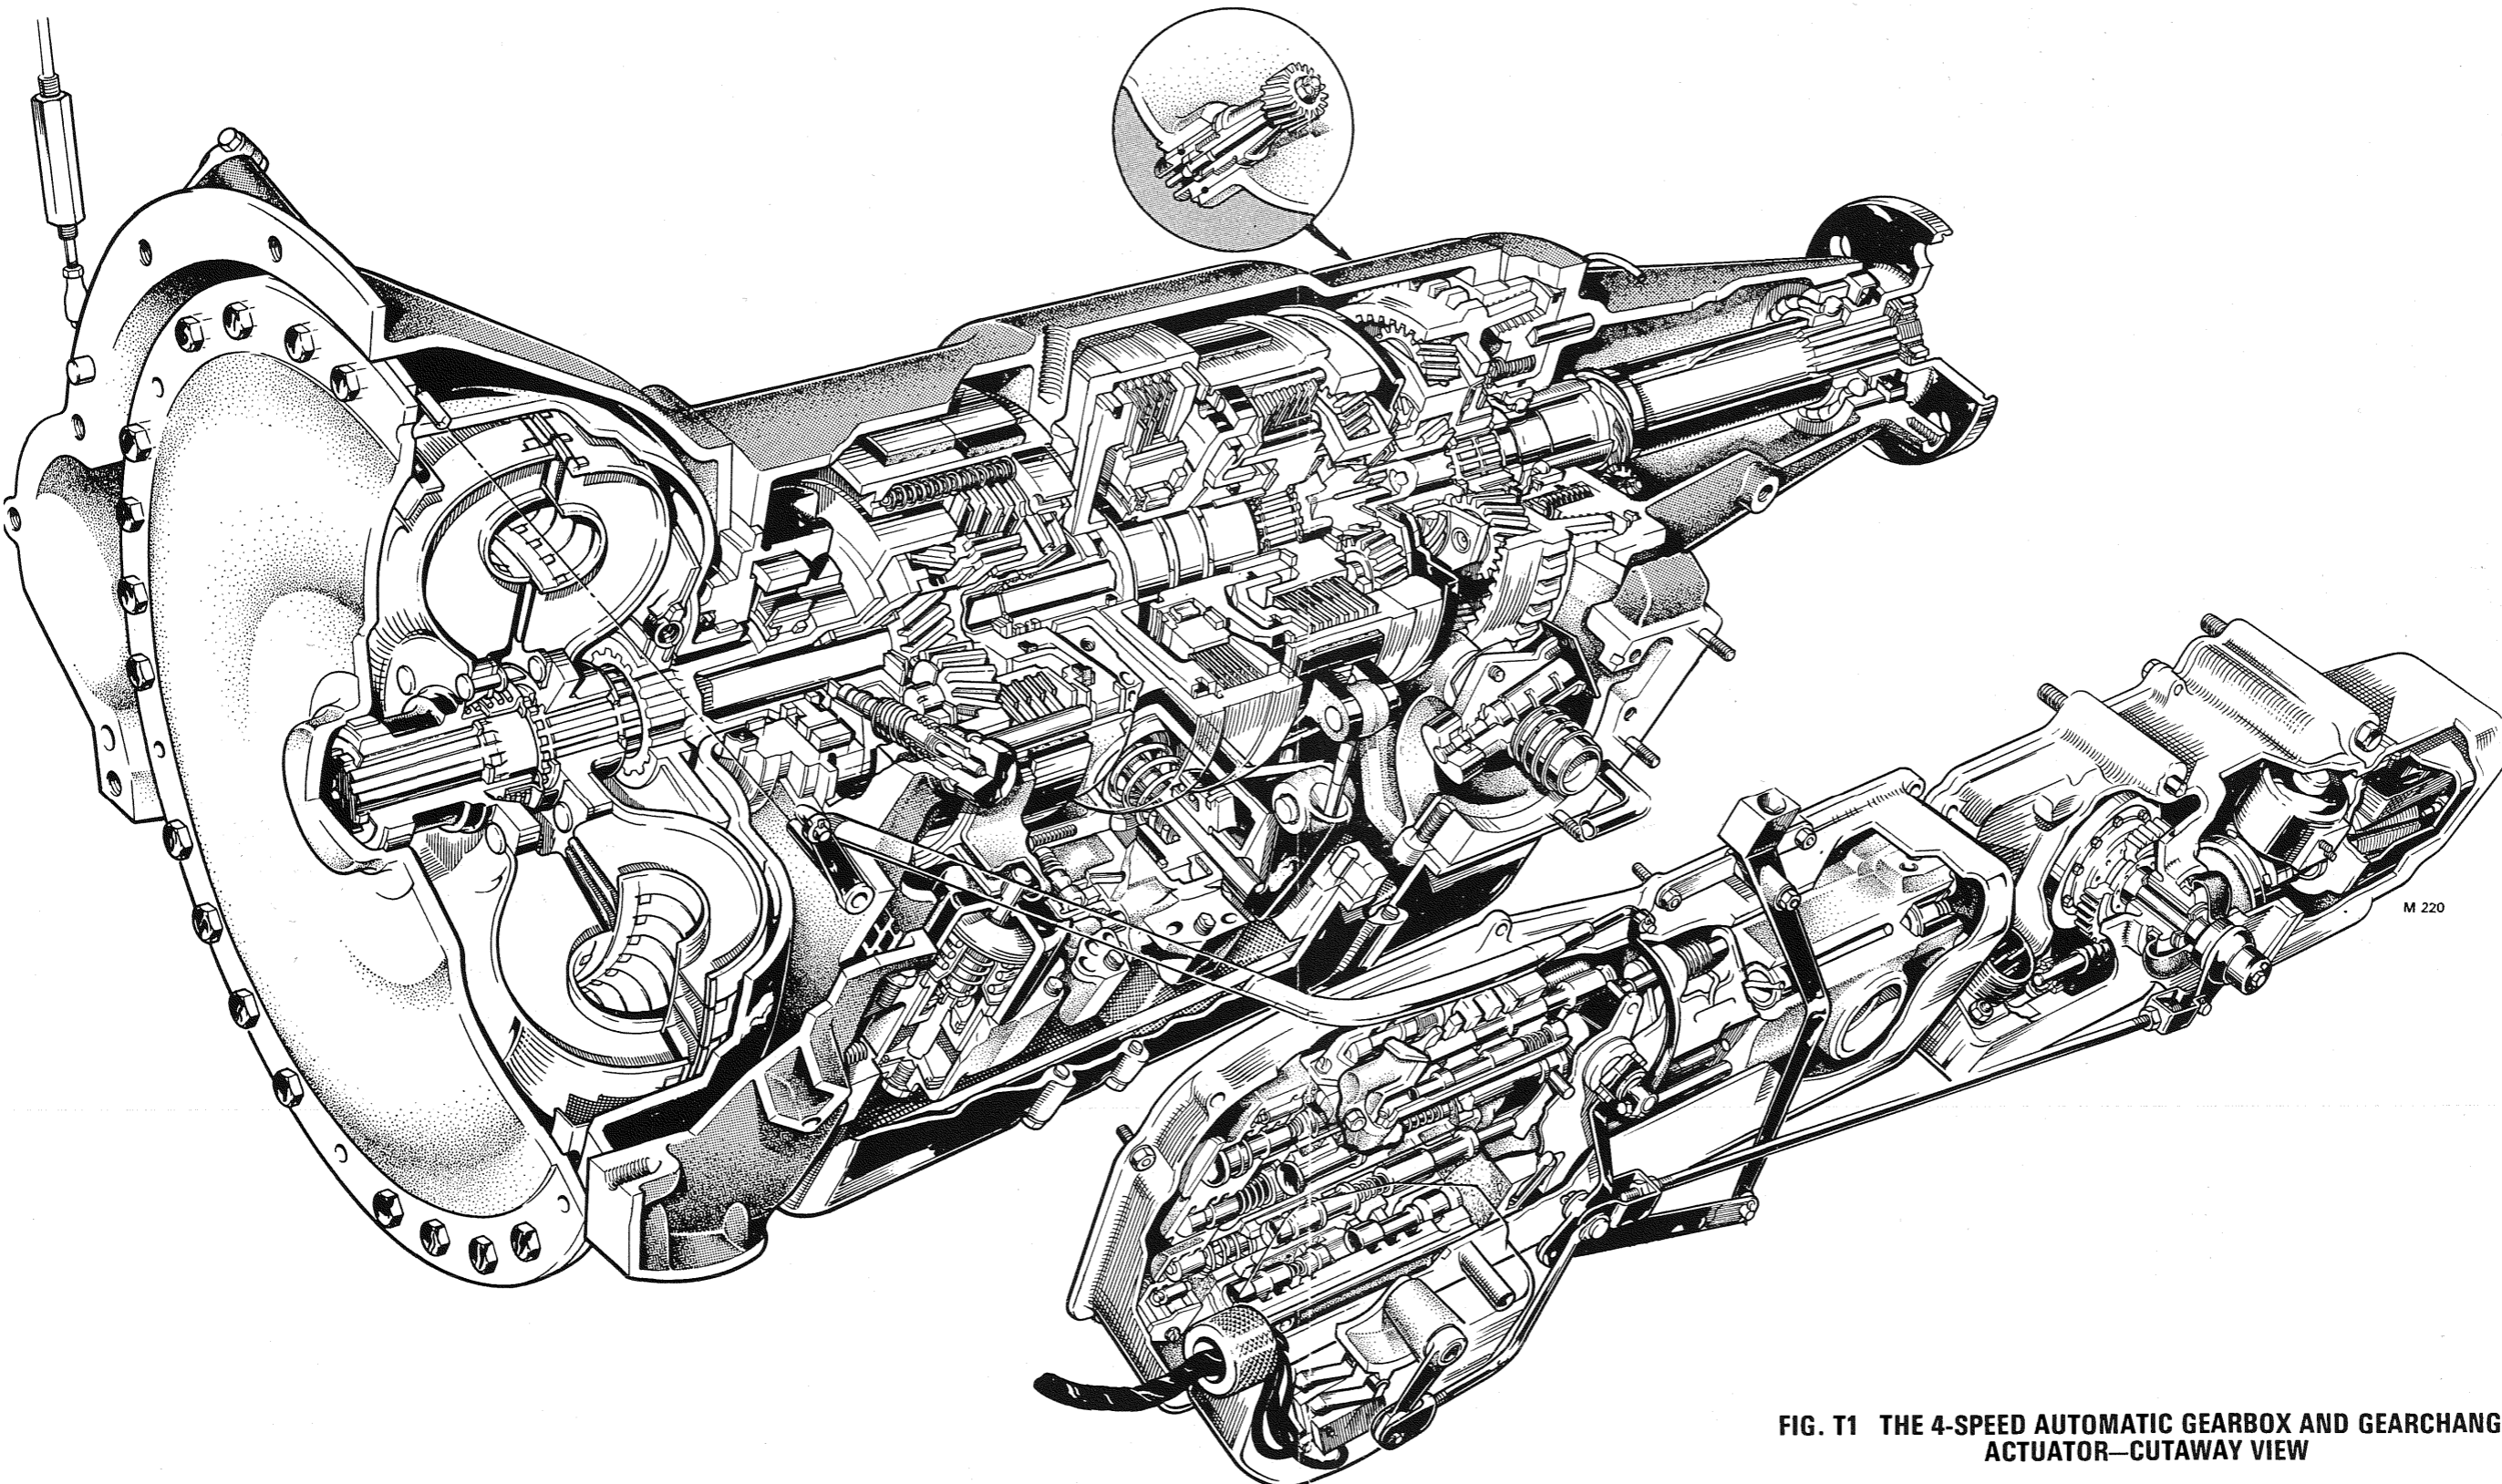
THE 4-SPEED AUTOMATIC GEARBOX AND GEARCHANGE ACTUATOR—CUTAWAY VIEW
